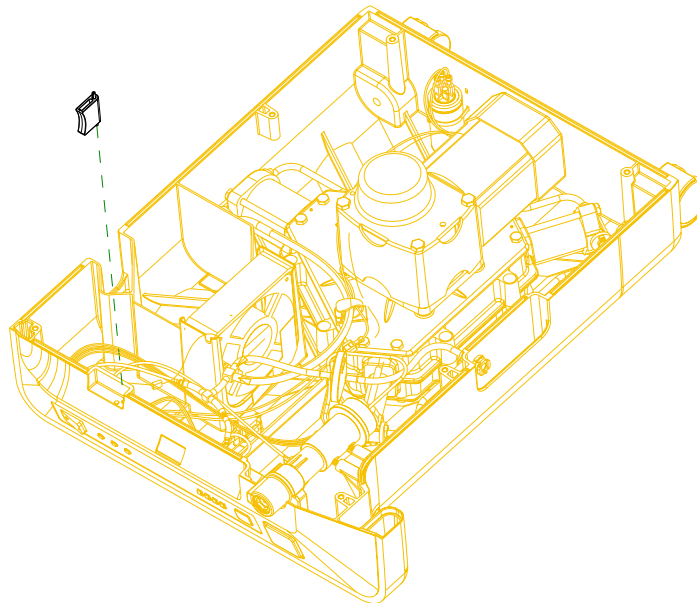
CYLINDER HOLDER PLACEMENT
